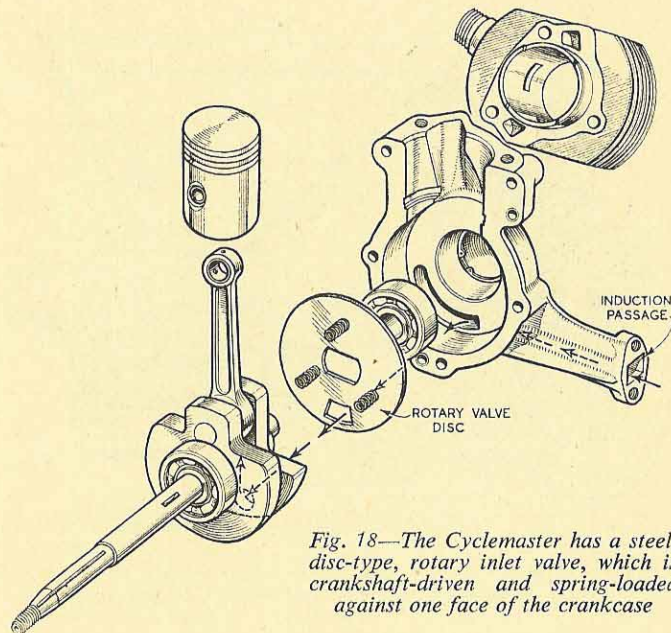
The Cyclomaster has a steel, disc-type, rotary inlet valve, which is crankshaft-driven and spring-loaded against one face of the crankcase
